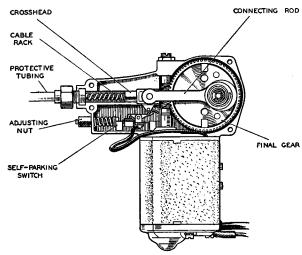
Showing the DR3 wiper motor with cover plate removed.
